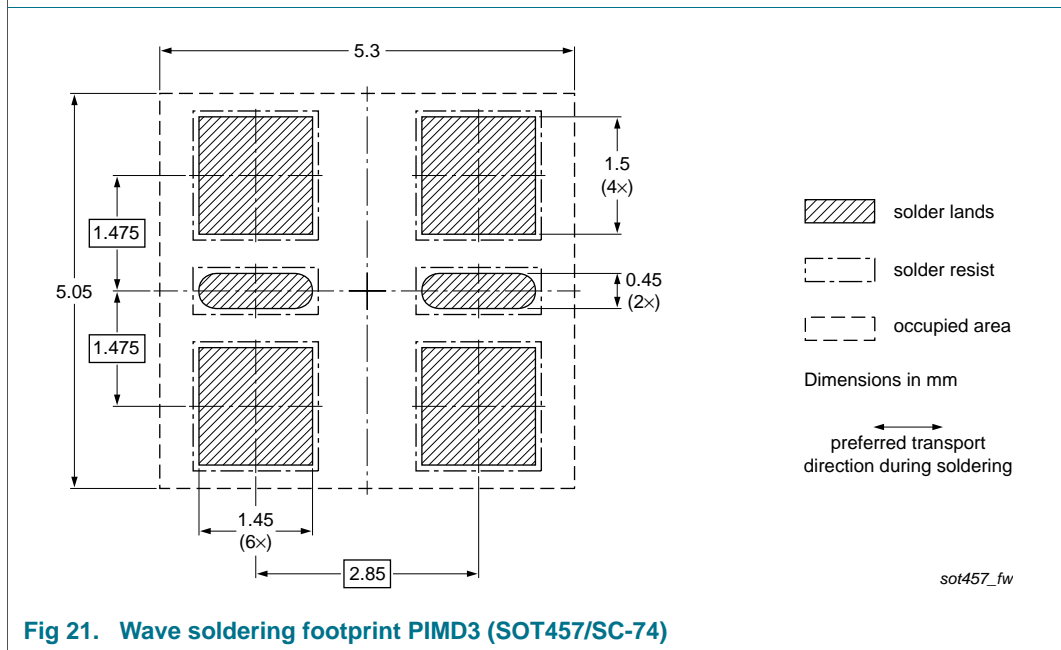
Wave soldering footprint PIMD3 (SOT457/SC-74)
